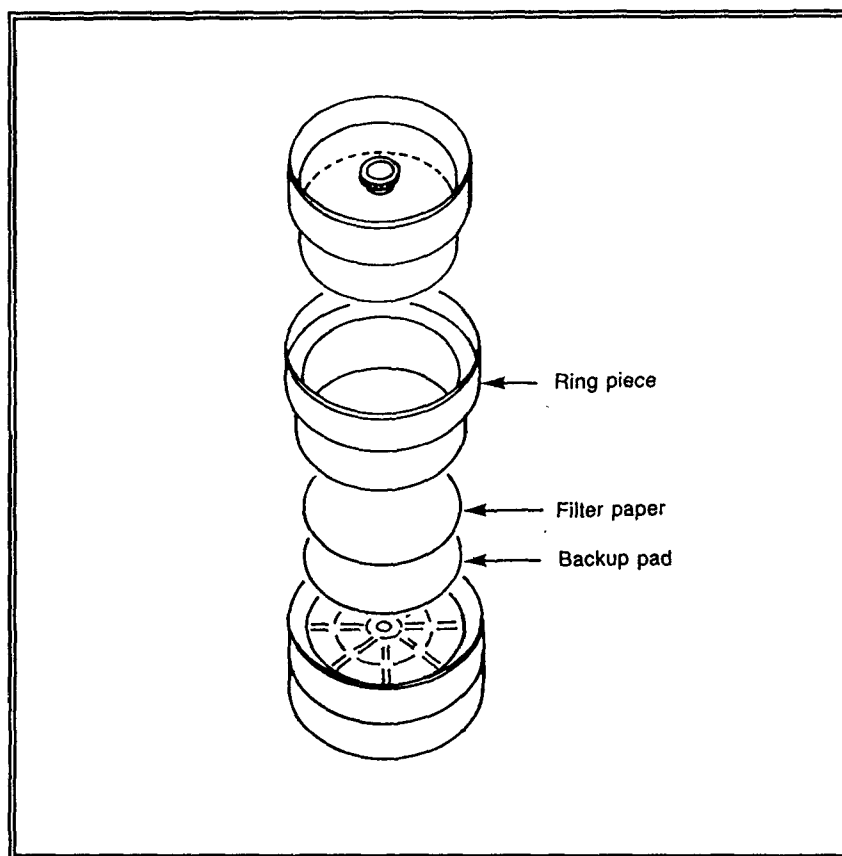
ASSEMBLY OF A THREE-PIECE FILTER CASSETTE
